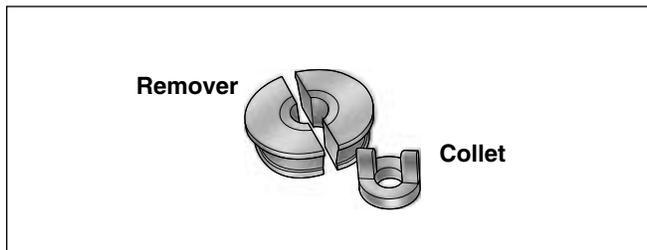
Steering Head Bearing Race Remover (Part No. HD-39301A)
